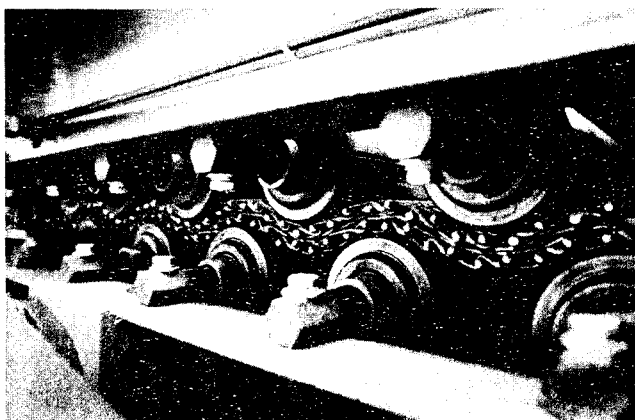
Side view of double mesh belt unit showing "working" action taking place on both sides of SMC sheet
